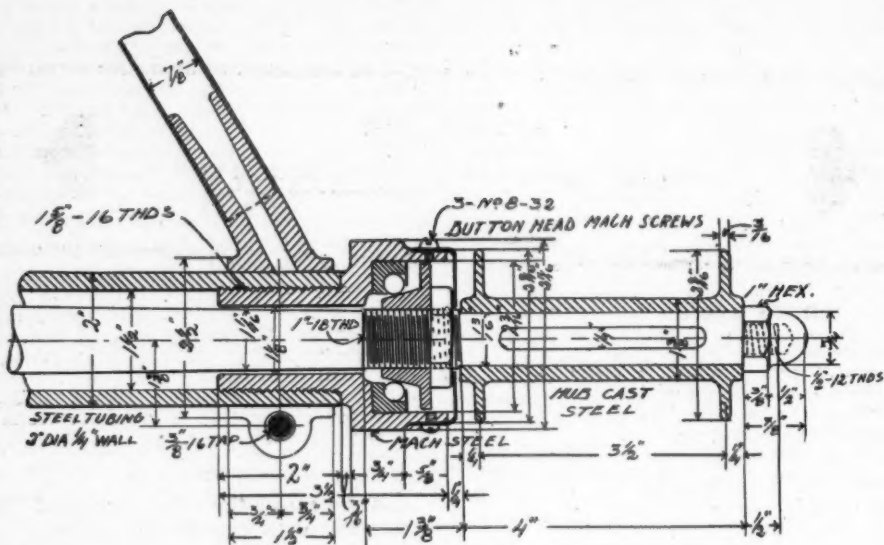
SECTIONAL VIEW OF END OF REAR AXLE.
